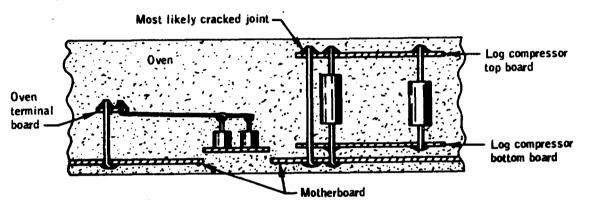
Suspected cracked solder joints in amplifier.
